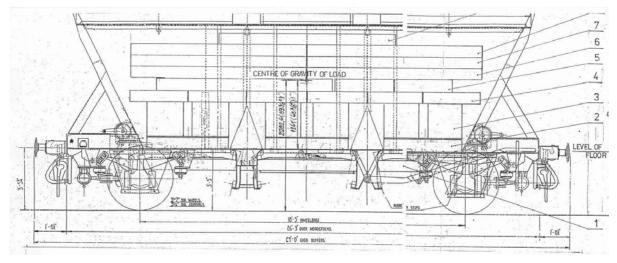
Dimensional drawing of the loaded wagon (taken from [8])
